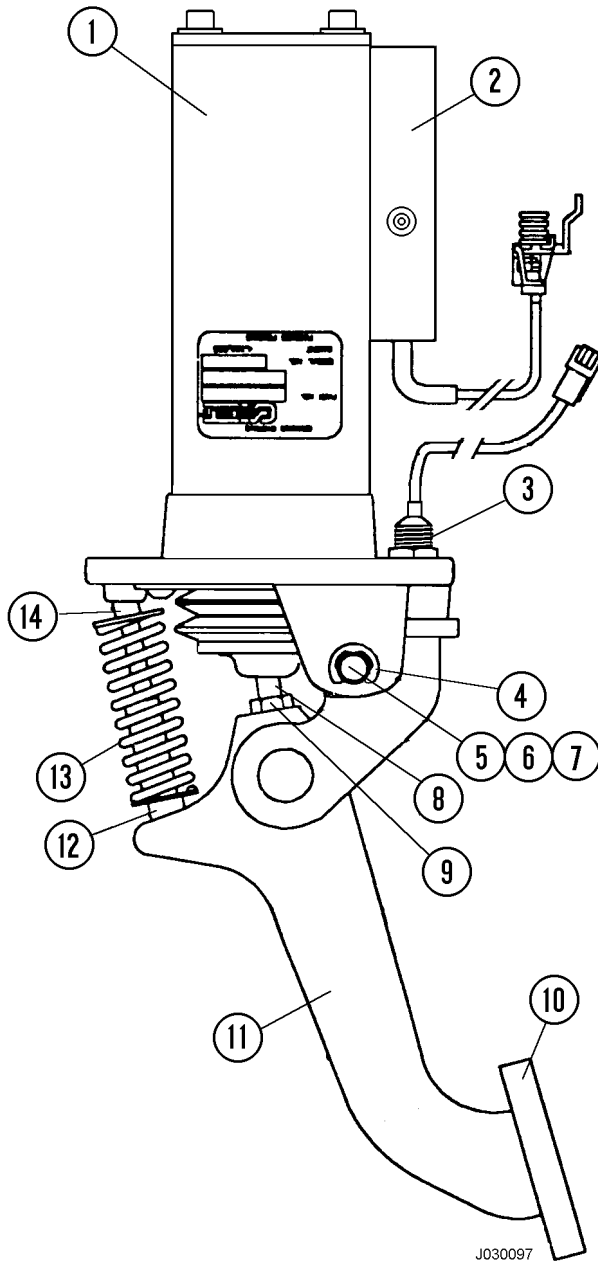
BRAKE VALVE ASSEMBLY
